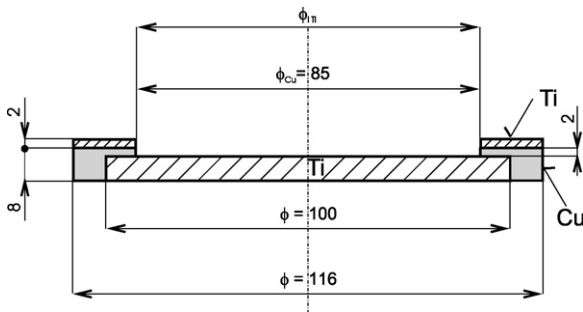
Geometry and dimensions of composed Ti/Cu target.
